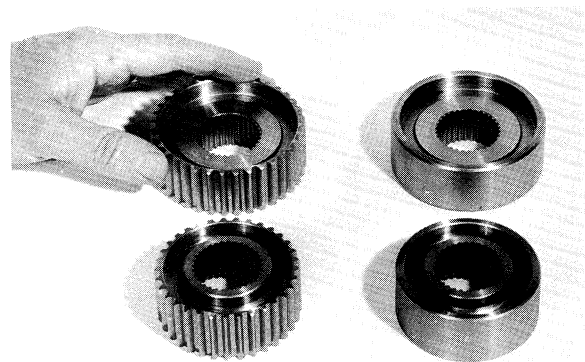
Two different steel synchronizer gears whose 11.4-pitch outside diameter spur teeth have varying designed tooth thicknesses. They are pot-broached on a Model VBA machine at 240 per hour.
